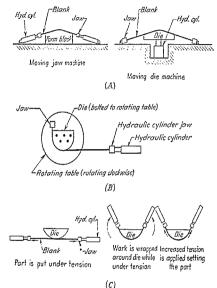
The three basic types of stretch-forming machines: (A) moving-ram machine; (B) rotary-table machine; (C) rotary-arm machine.
